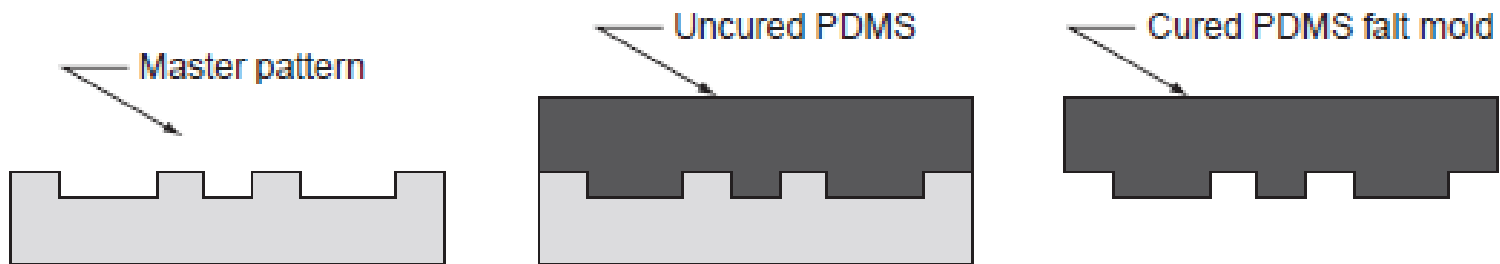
Steps in mold-making for soft lithography: (1) master pattern fabricated by traditional lithography, (2) polydimethylsiloxane flat mold is cast from the master pattern, and (3) cured flat mold is peeled off pattern for use.
